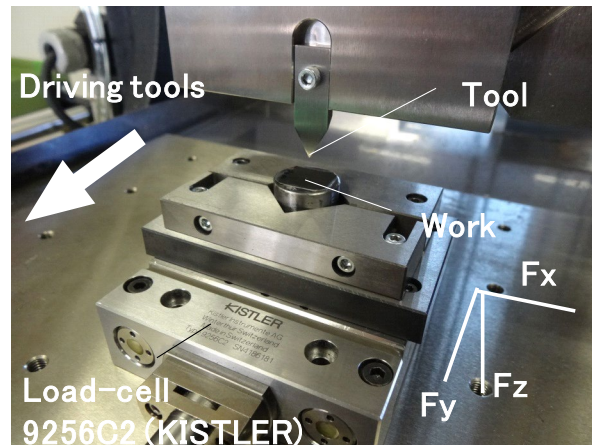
A machining process simulation to measure the transient of axial cutting forces (F_x , F_y , F_z) applied to the cutting tool during the machining of nitrided works.
